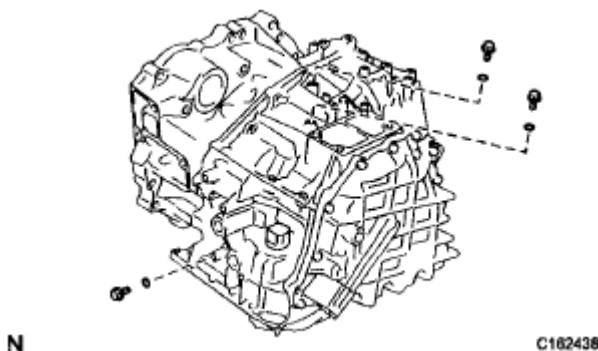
Identifying No. 1 Transaxle Case Plugs
